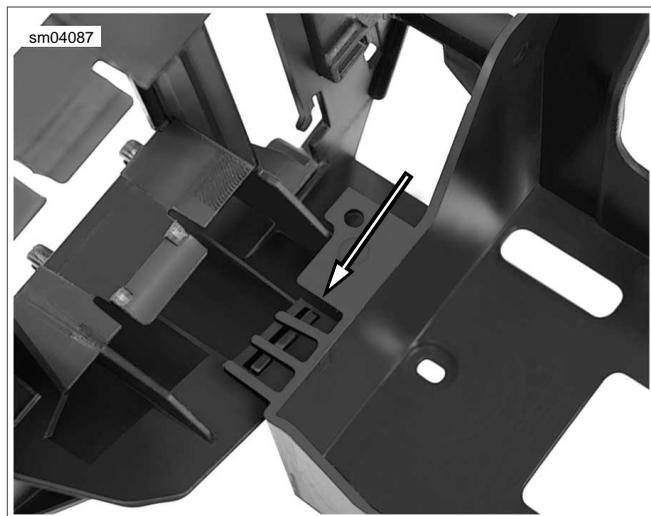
Disengage Left Side Caddy Tab From Battery Tray Slot
